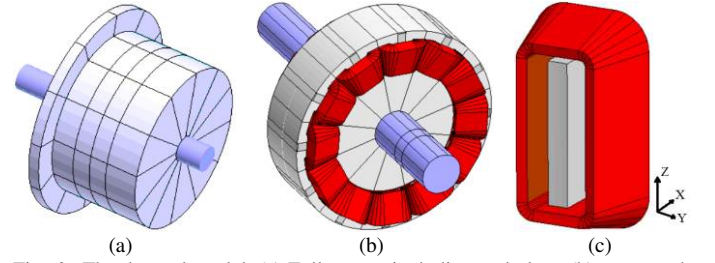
The thermal model. (a) Full motor, including end plate, (b) stator and rotor cores, PMs, coils and shaft, (c) single coil surrounding PM.
